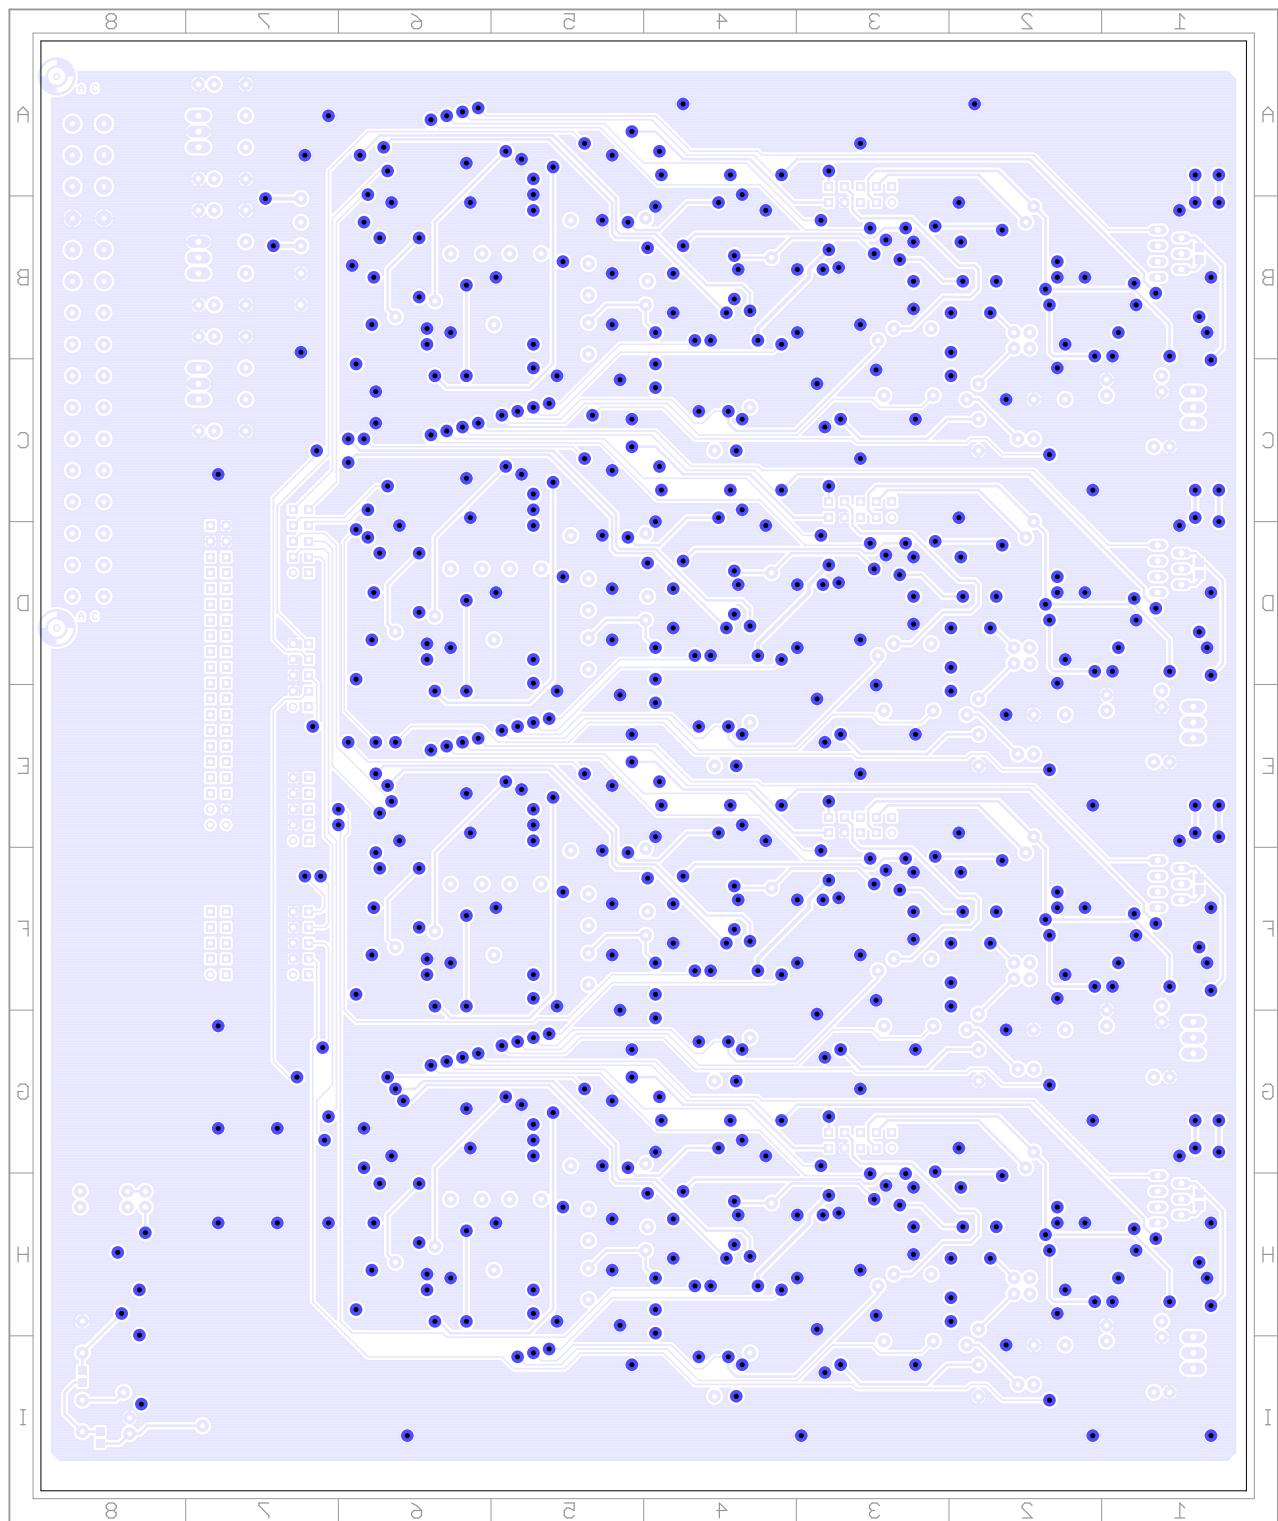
Board bottom view showing connectors, test points, vias and wired components
